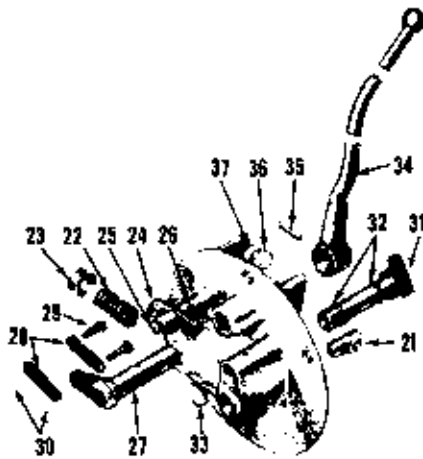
Exploded view of control valve unit. Pto shifter lever is also installed in plate, but is not shown in above view.
